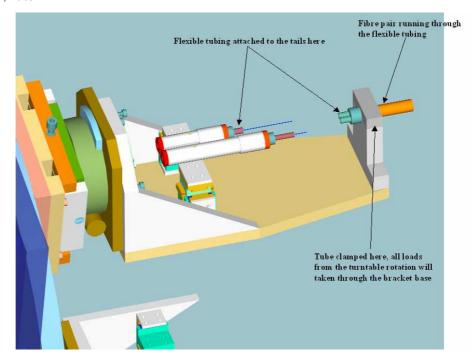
The revised input fibre assembly stage, showing the extended platform and clamping arrangement.
